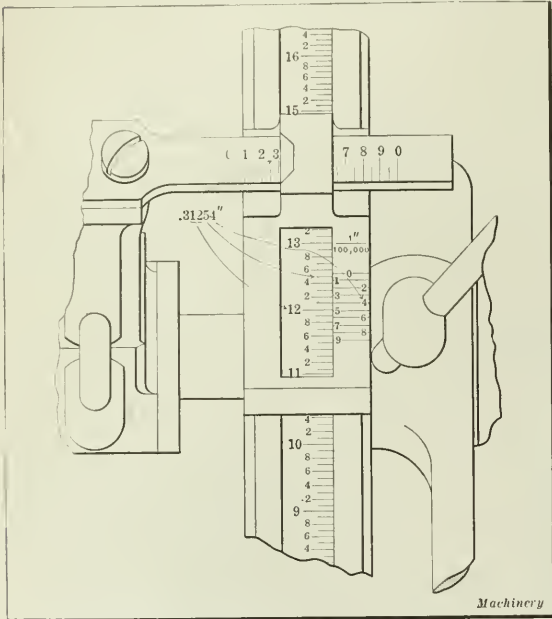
Diagram illustrating Method of taking Measurements on Newall Measuring Machine
